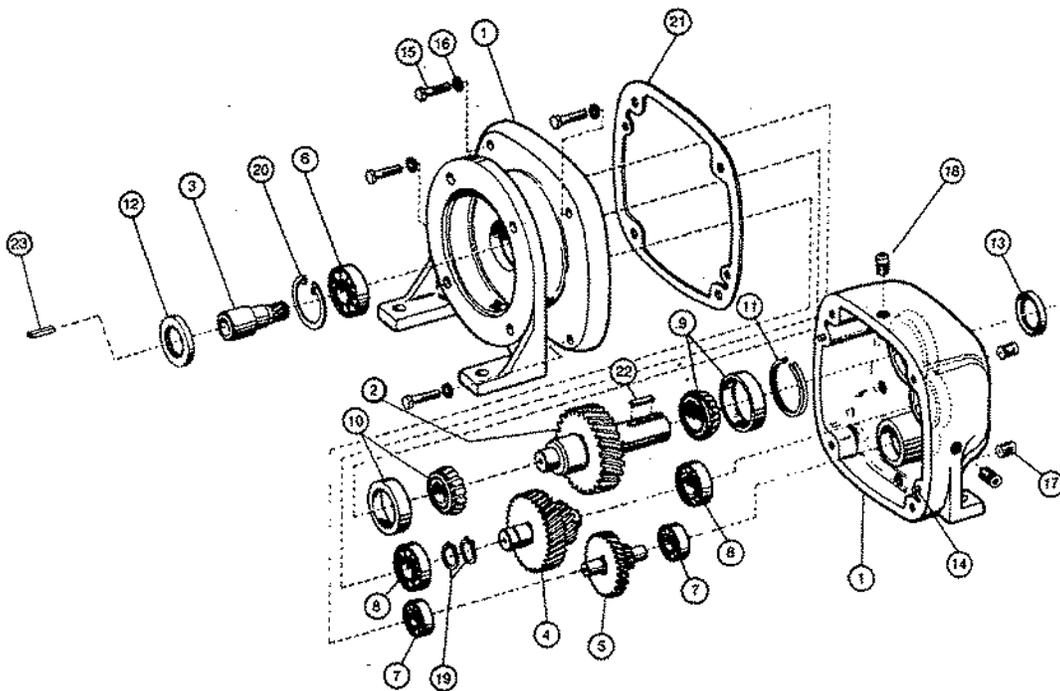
Exploded View, Model 22934-A Dayton Speed Reducer
